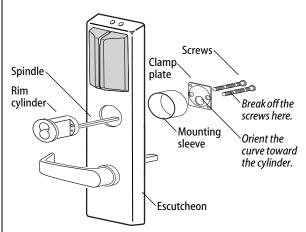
Installing the cylinder for Von Duprin rim and rod exit devices
